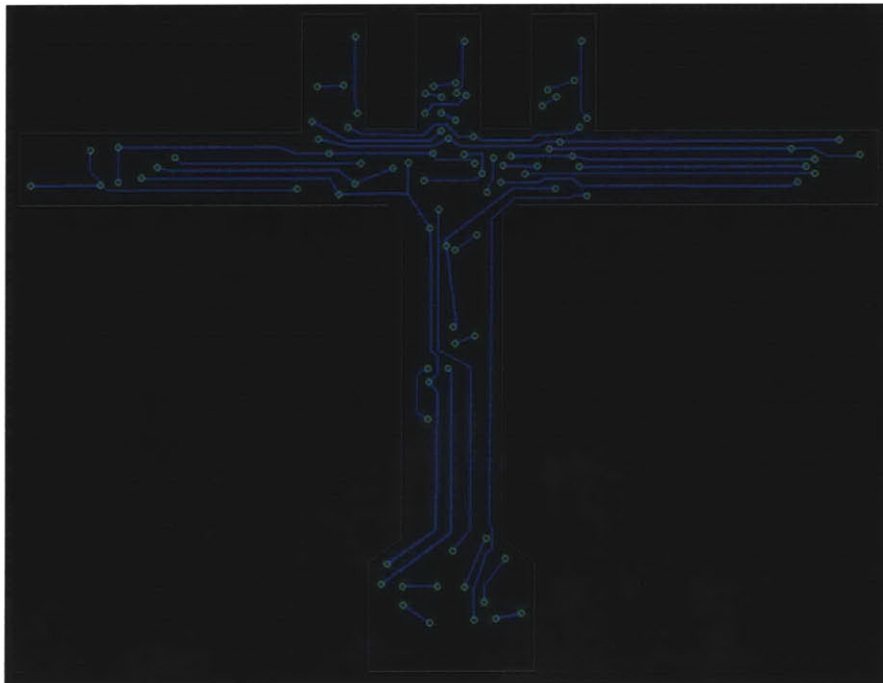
Bottom layer of PCB layout from Eagle. Wire traces are shown in blue and vias a.k.a. connection holes are shown as green circles.
